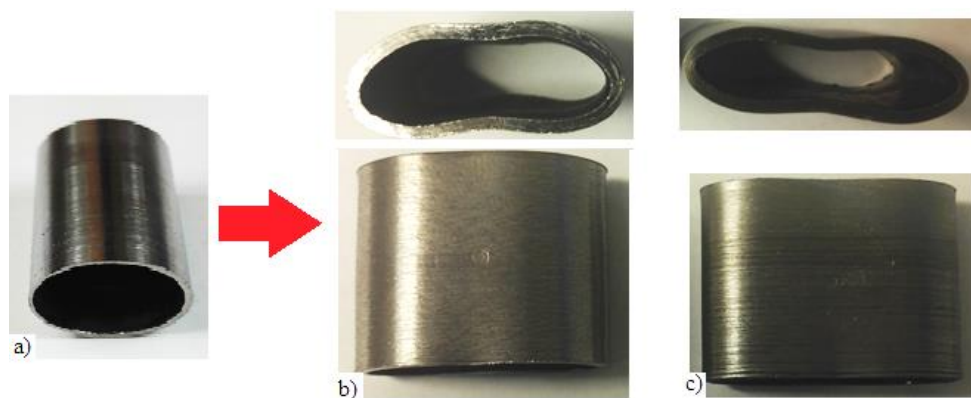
Flattening test a) Specimen before test b) F2T tube and c) Machined tube after test
